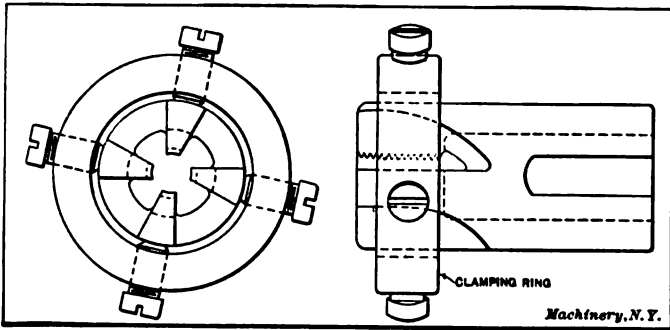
Spring Screw Threading Die and Adjusting Ring
